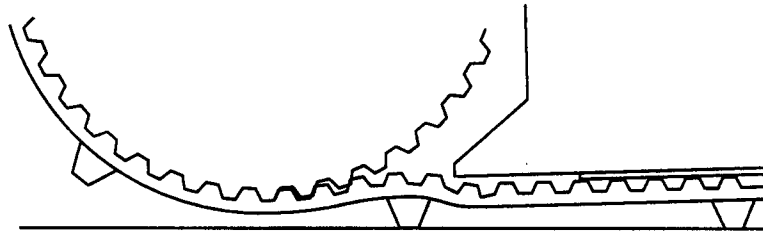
Undesired tensioning of drive belts caused by drive belt feet.
